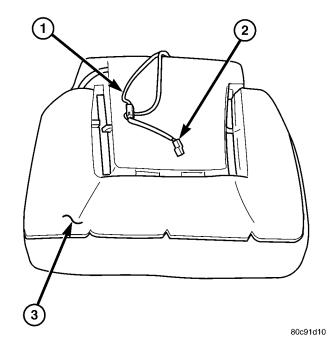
HEATING ELEMENT INSTALLED - TYPICAL
